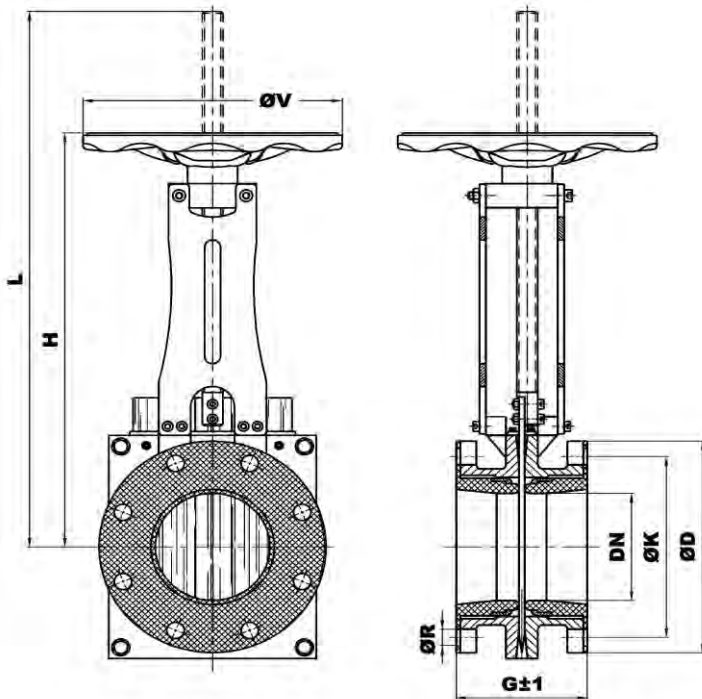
KGV SL series fully lugged rising stem with handwheel & gearbox
